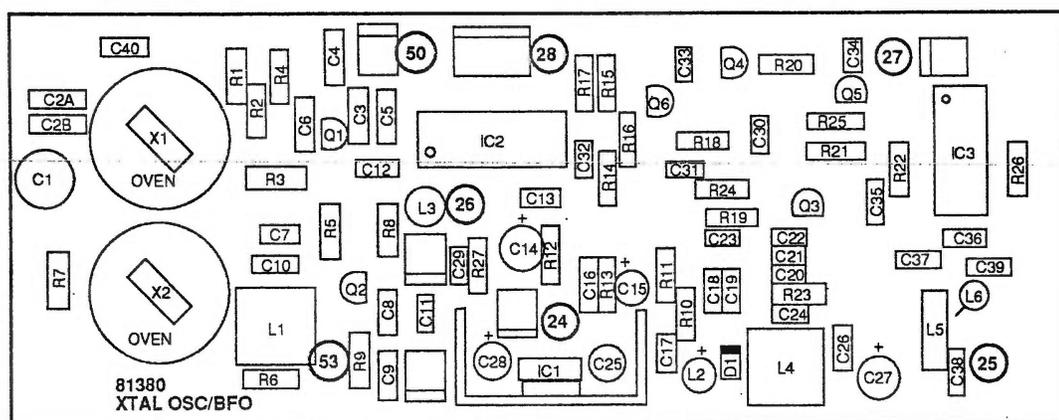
81380 BFO UNIT COMPONENT LAYOUT
